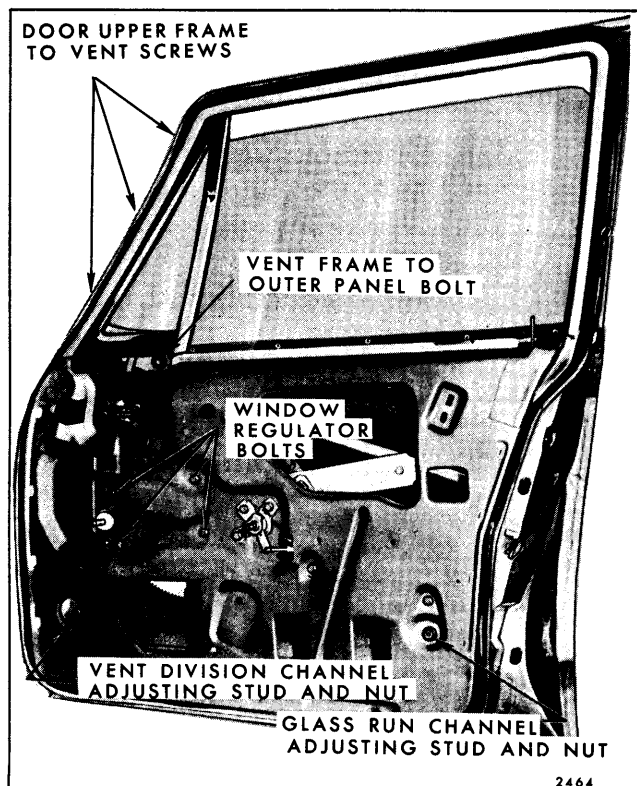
Door Ventilator and Regulator Attachment - "A" Styles
